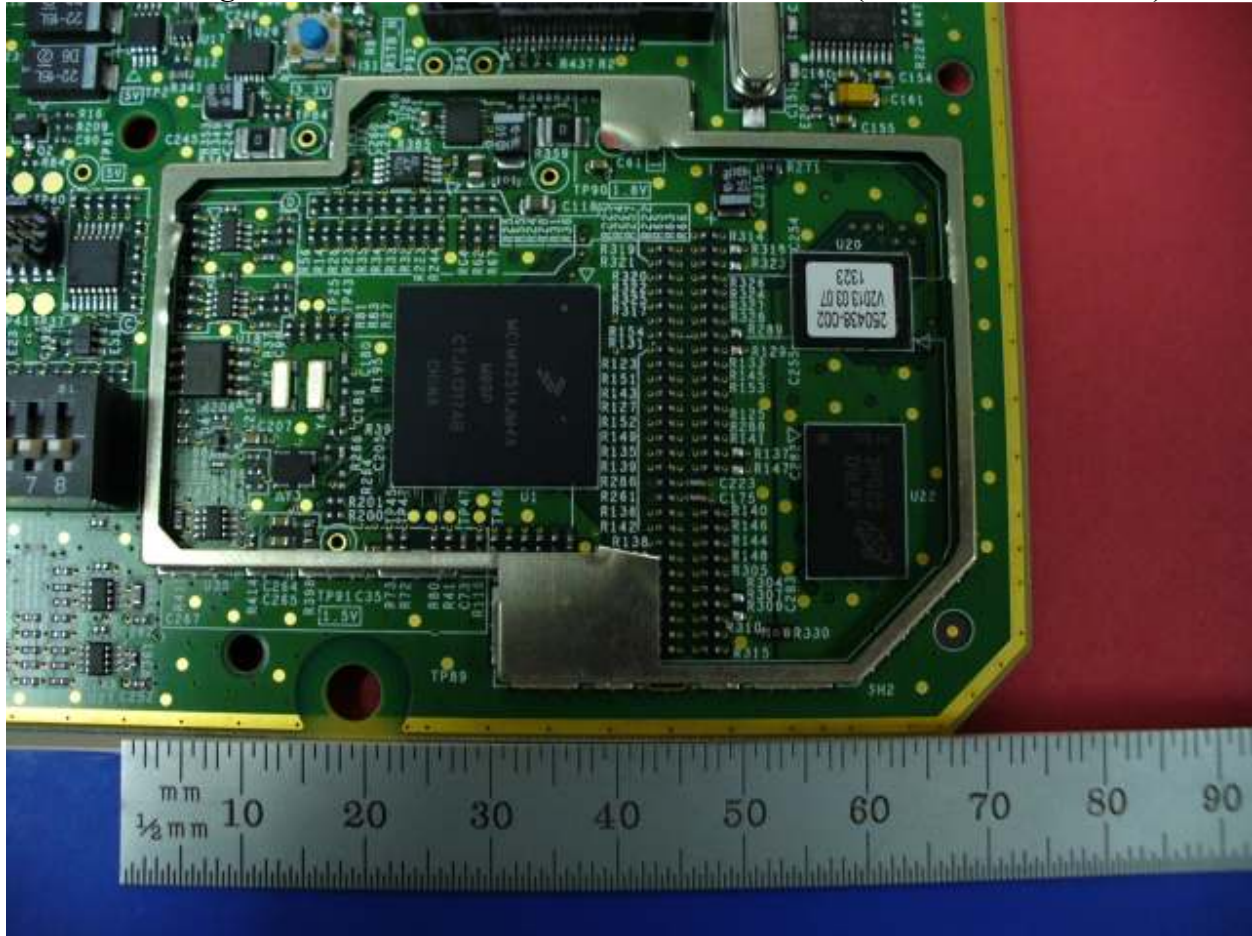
Model 6290 PCB Top Shield Section (shield cover removed)
